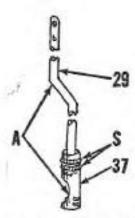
Schematic view of shift rod and shift cam used on Fishing Scott models. When assembling, offset portion of shift rad (29) must be aligned with flat of cam (37) as shown at (A). Be sure seals (5) are installed.
